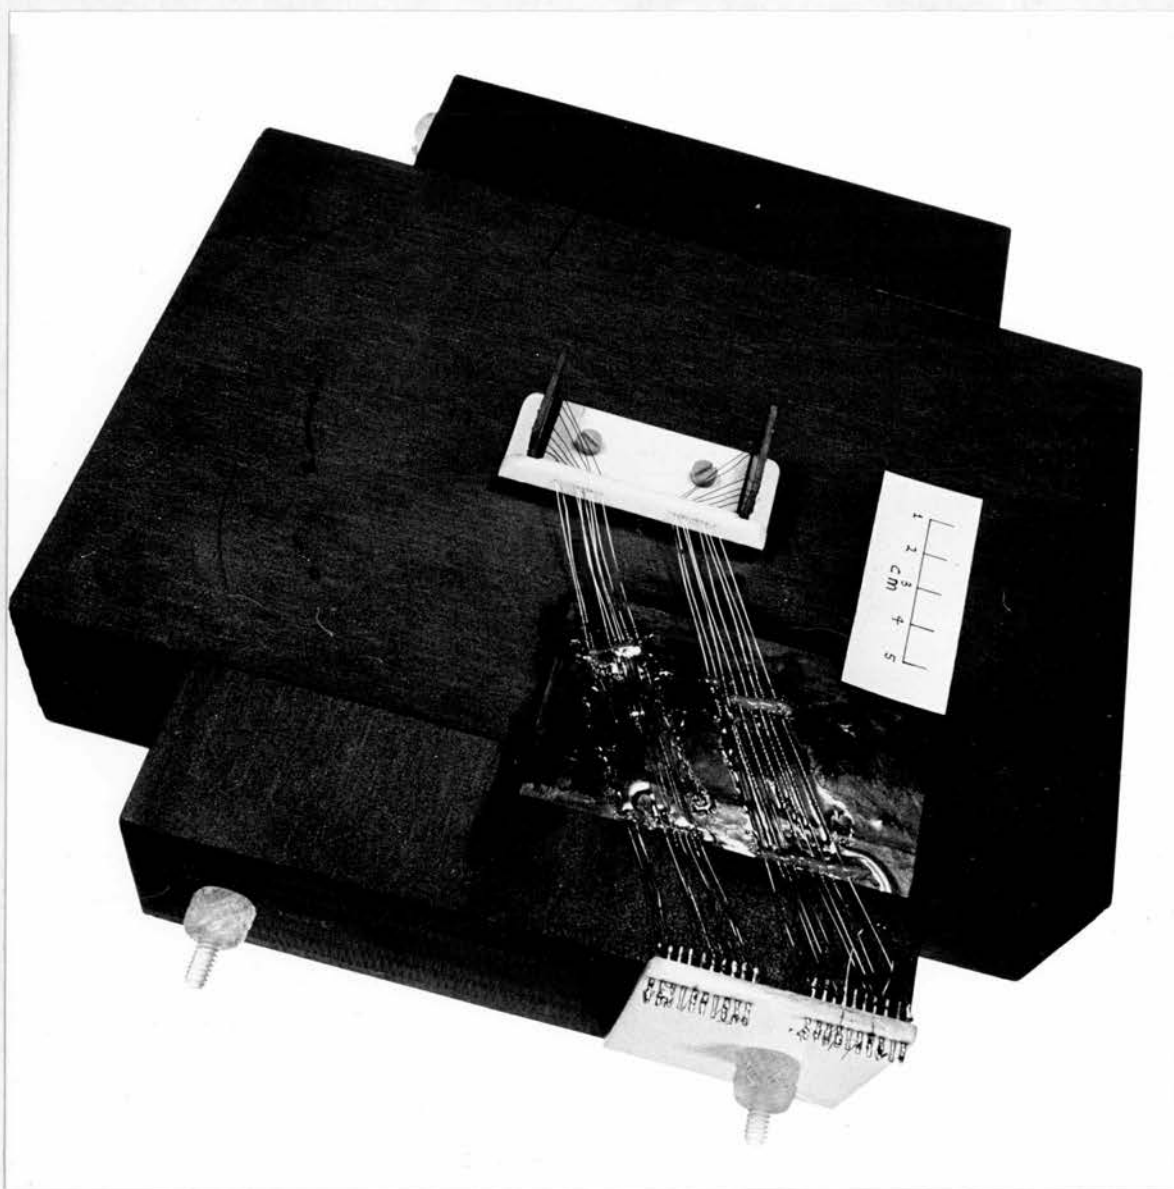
PRINTED CIRCUIT BOARD CONNECTIONS AND TAG BOARD
